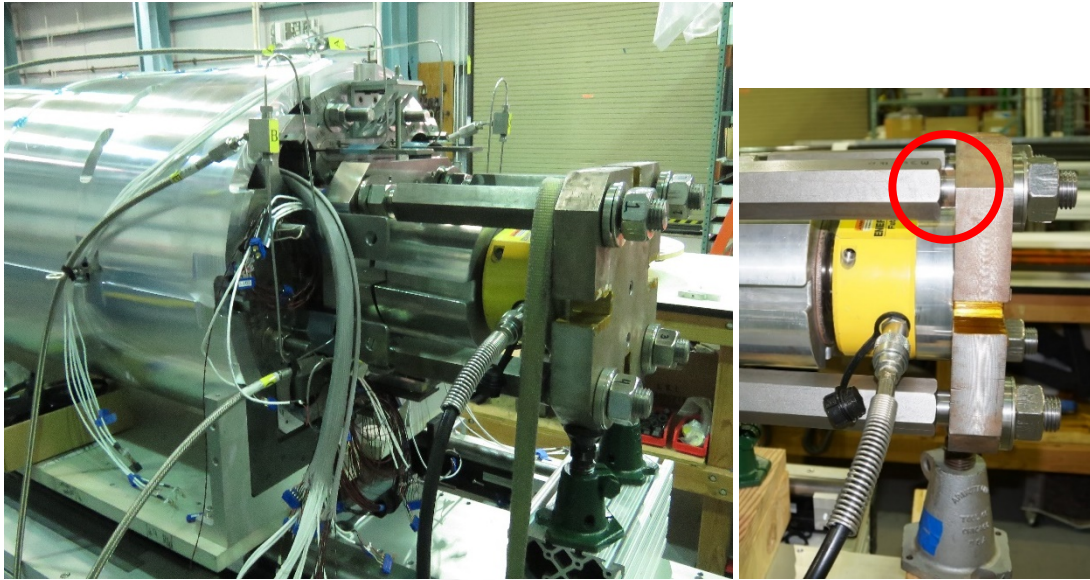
Hydraulic cylinder attached to RE axial end plate. Leave at least $\frac{1}{4}$ " between step and backing plate, aim for a plate to plate distance of 11".
